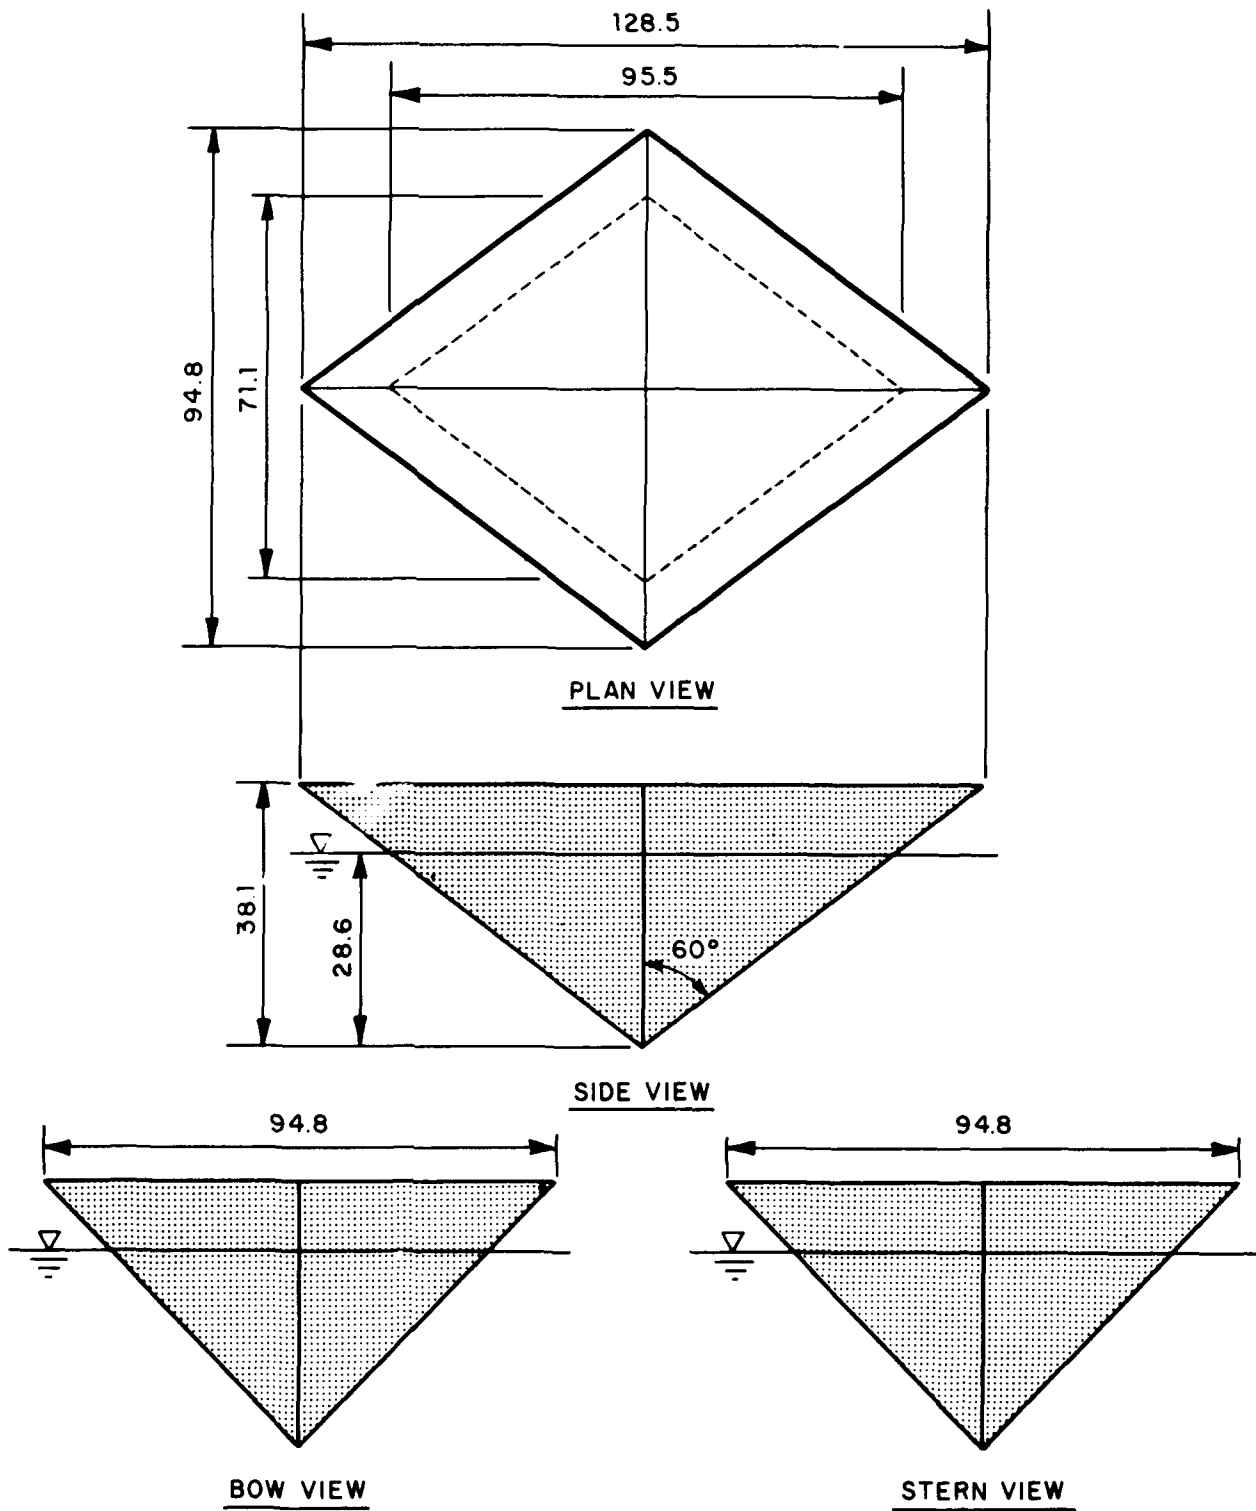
Dimensions and geometry of the 1:15-scale wedge hull. All dimensions are in centimeters.
